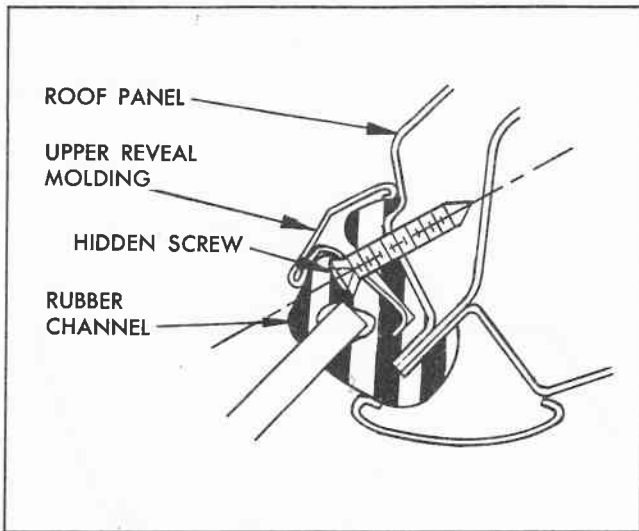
Cross-Section of Upper Reveal Molding and Windshield Weatherstrip
